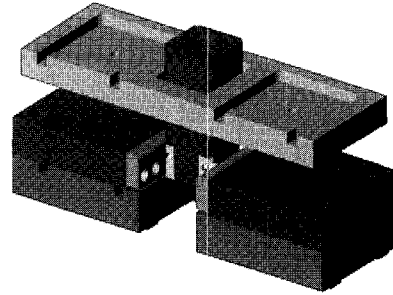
Experimental apparatus of U-draw bending test for the tailor-welded strip
